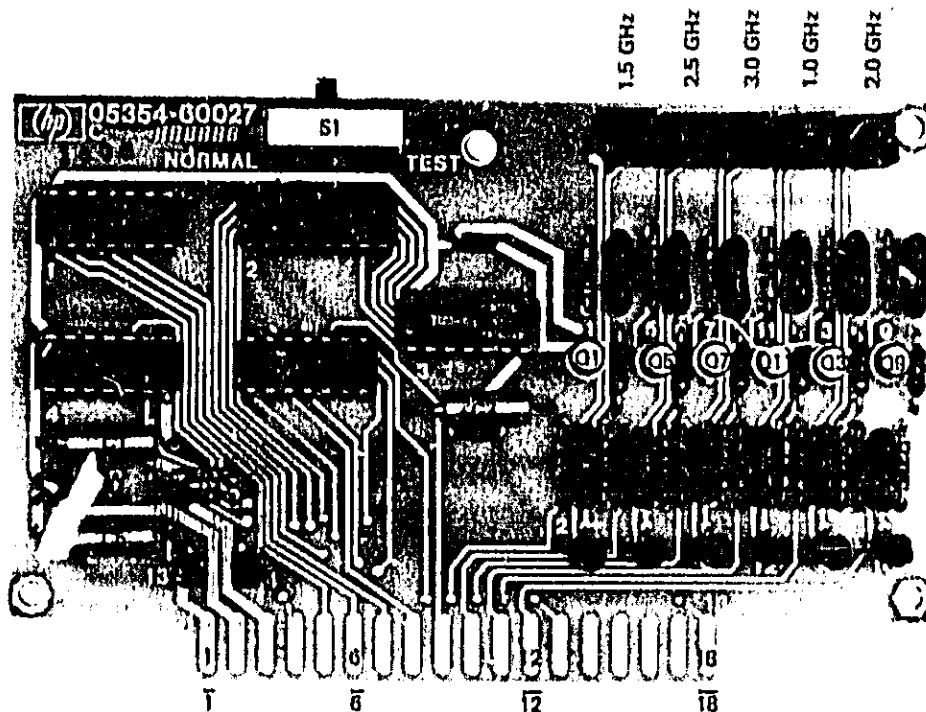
A8 Component Locator for 05354-60027 (SERIES 1808)
